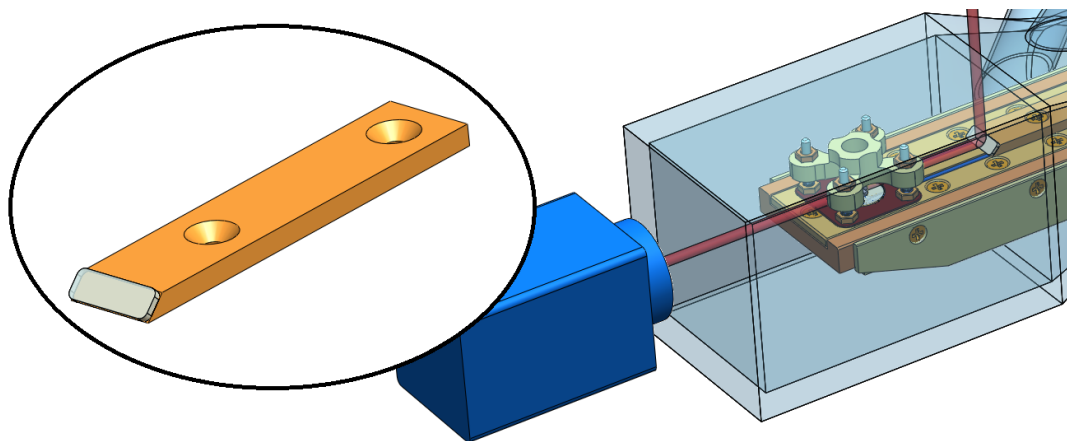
Solidworks drawing of the mirror mounting in the vacuum chamber.
